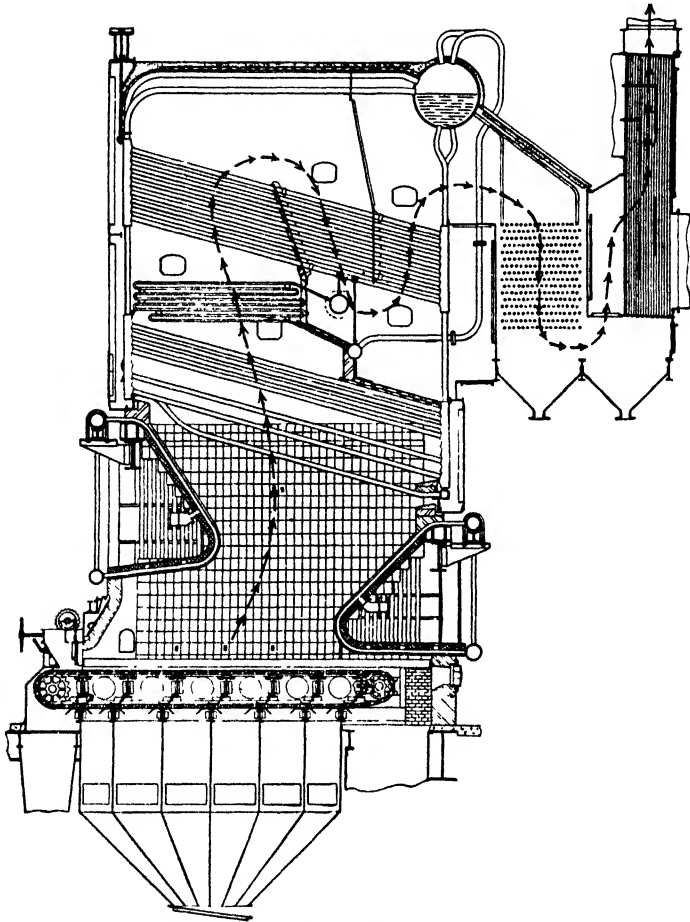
Babcock and Wilcox straight-tube boiler with superheater water walls, economizer, and air heater.
